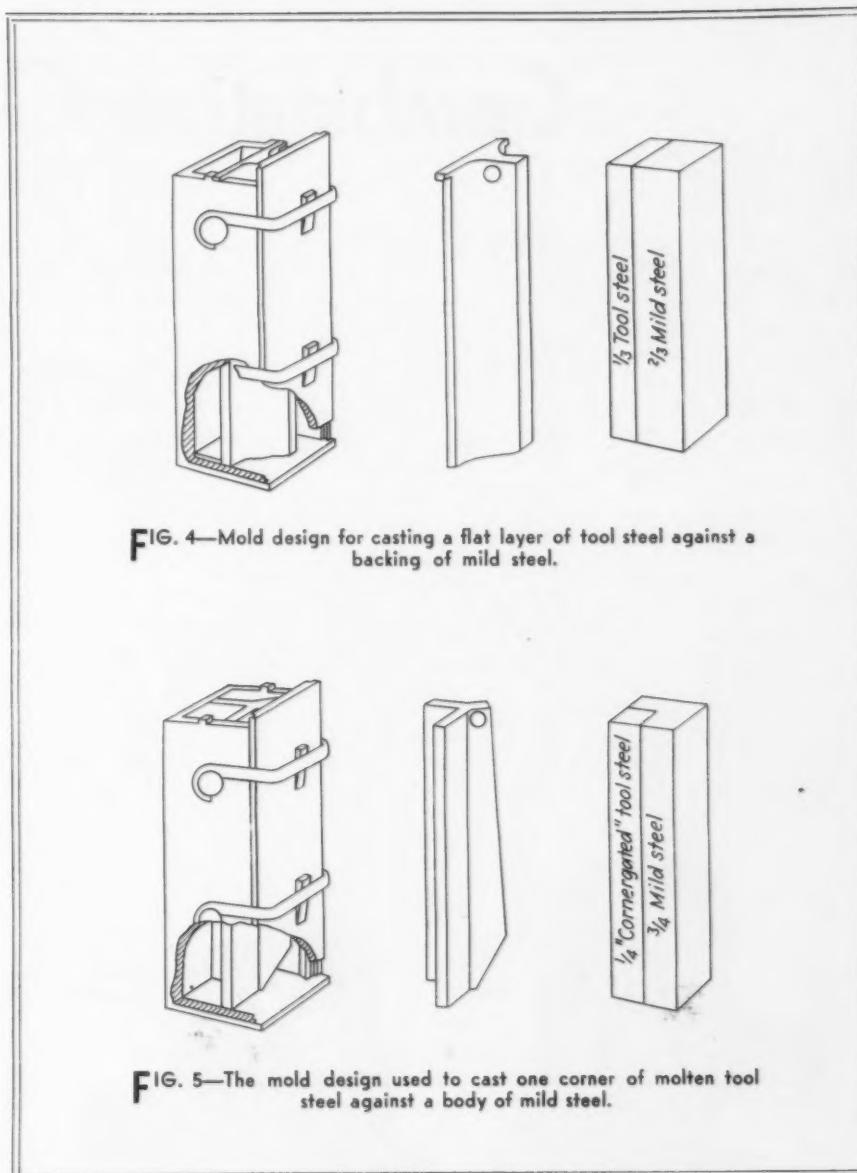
Mold design for casting a flat layer of tool steel against a backing of mild steel.
